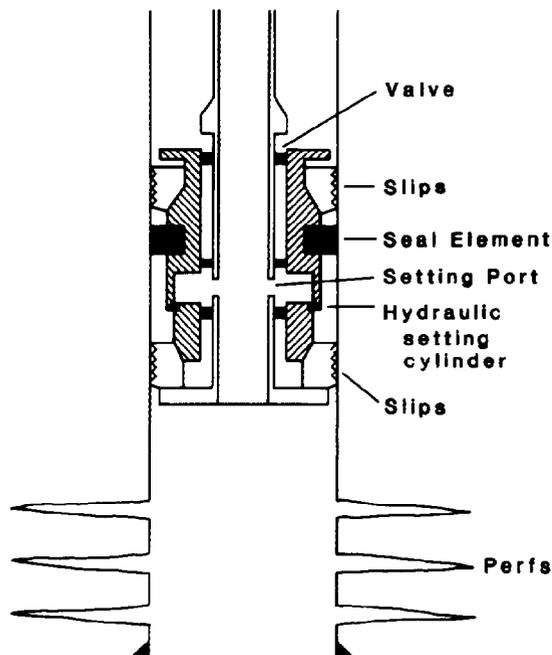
Hydraulic packer is set by tubing pressure.
